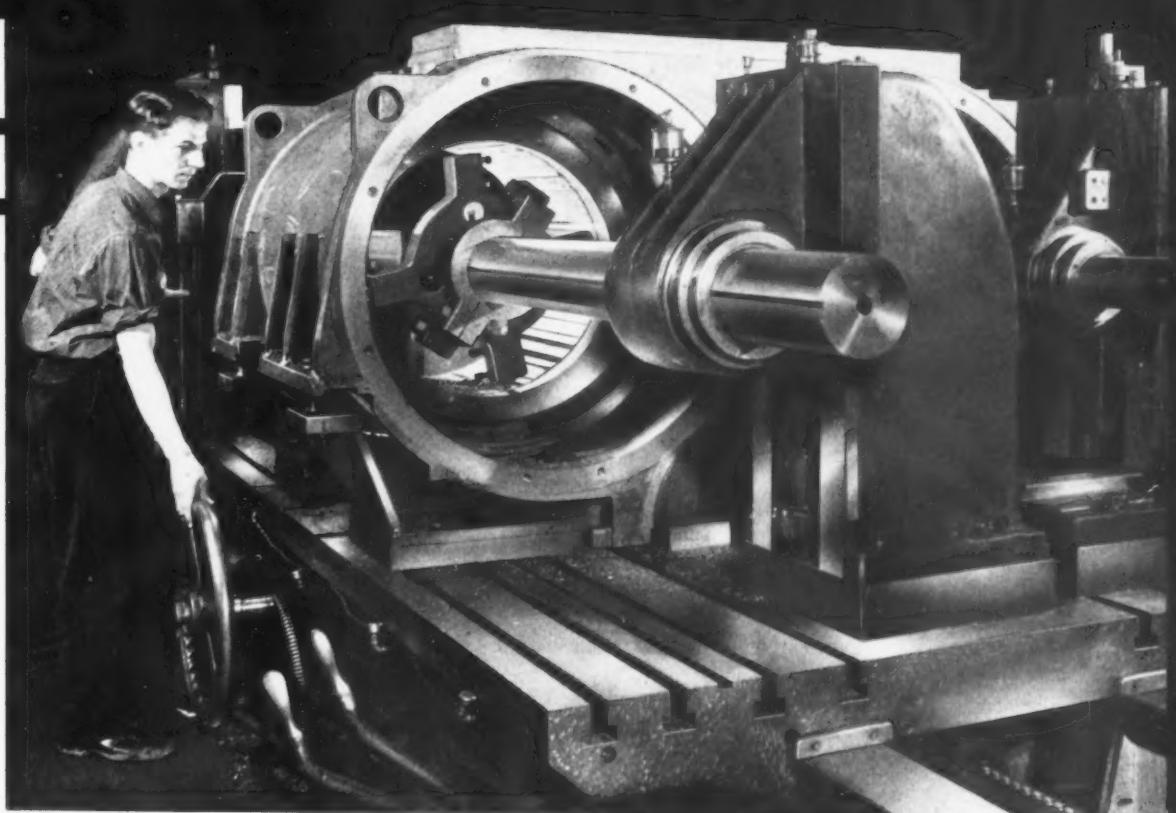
(Above) Betts Triple-bar Boring Machine which Simultaneously Machines Both Stator Cylinders of Twin Motor Frames and Also the Quill Bearings
